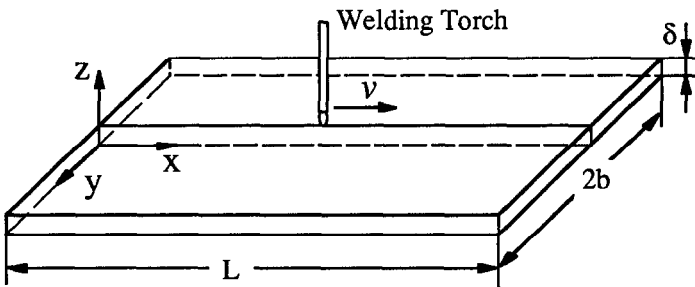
Schematic sketch of welding on a thin plate of mild steel
